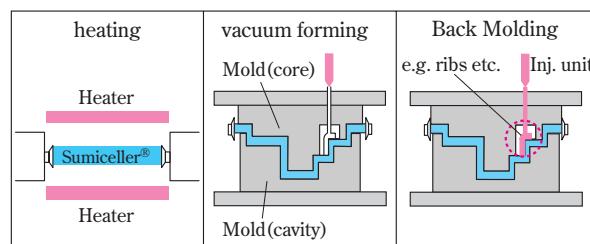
Back Molding Process (Combination of vacuum forming and injection molding)
